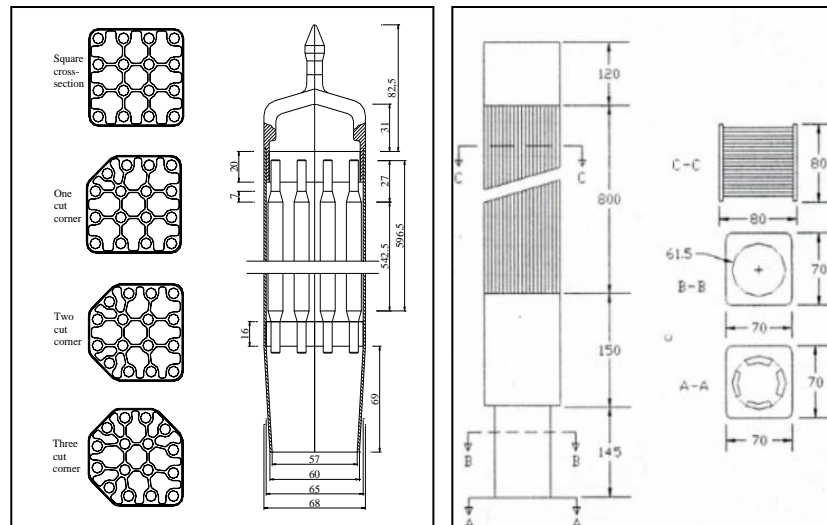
Different fuel types: a) EK-10 Rod type, b) MTR plate type.
